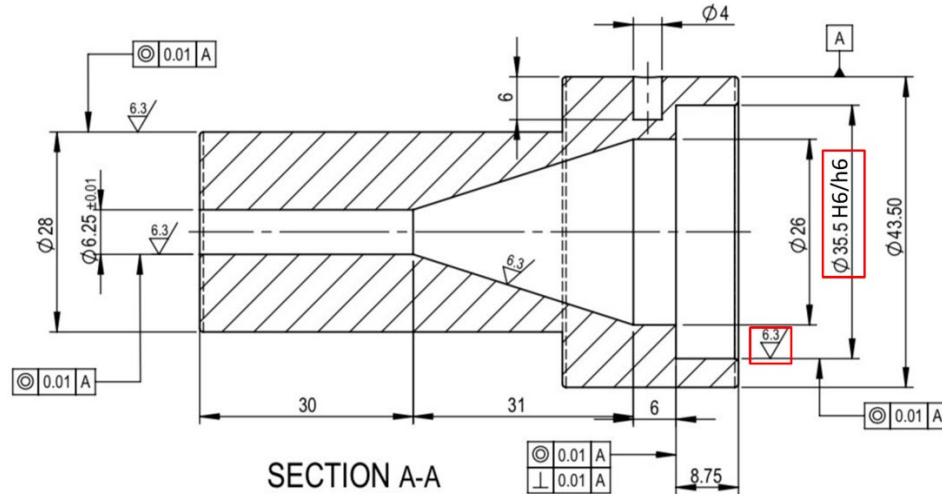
Technical drawing of the bushing component illustrating the precision-machined surfaces and the H6 tolerance specification for the self-centering interface.
